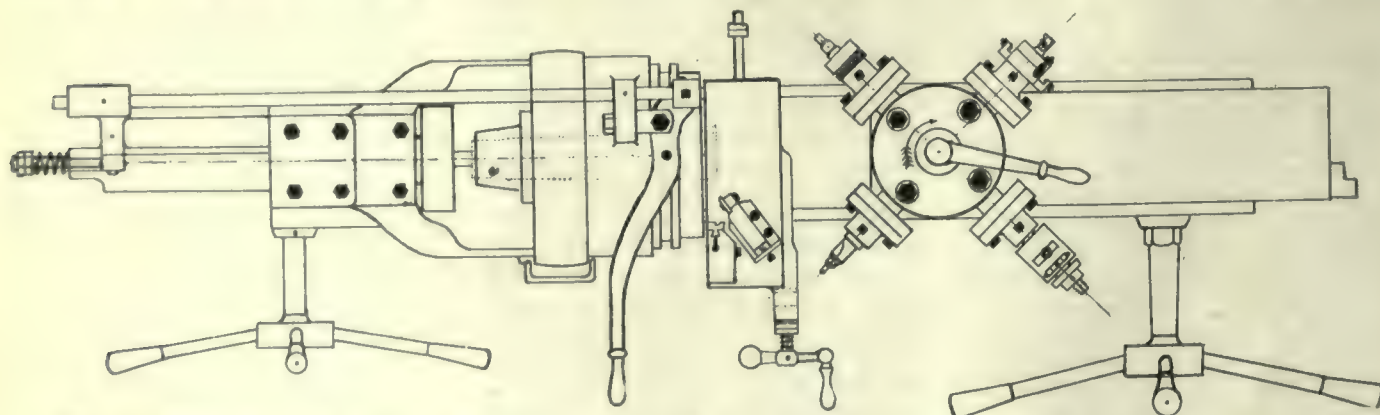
GENERAL TOOLING LAYOUT FOR MACHINING THE 3-IN. RUSSIAN CARTRIDGE CASE SHELL.
